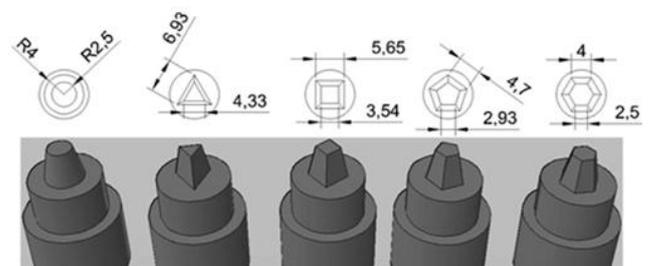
Geometries of five tool profiles and weld joints made with five tools.
